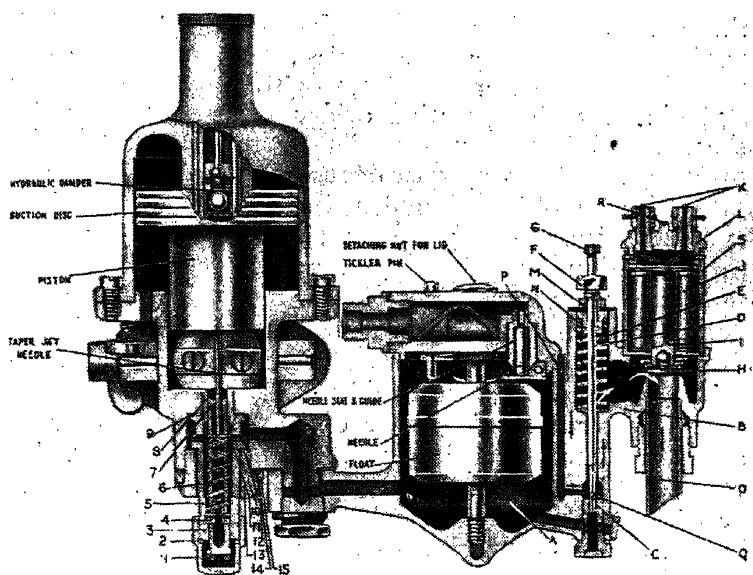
The S.U. Carburettor with Thermostatic Control.
